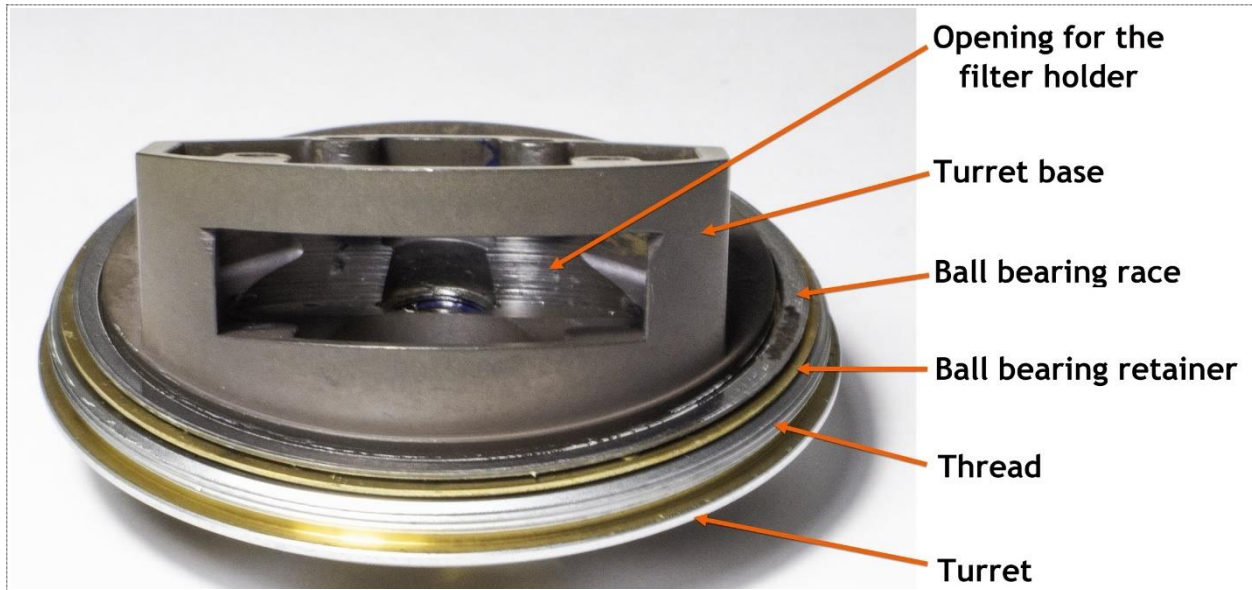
The nosepiece after the turret's locking ring has been removed. The large turret ball bearing rests on the rim of the turret base. The bearing balls are not visible here because they are below the ball bearing race.
